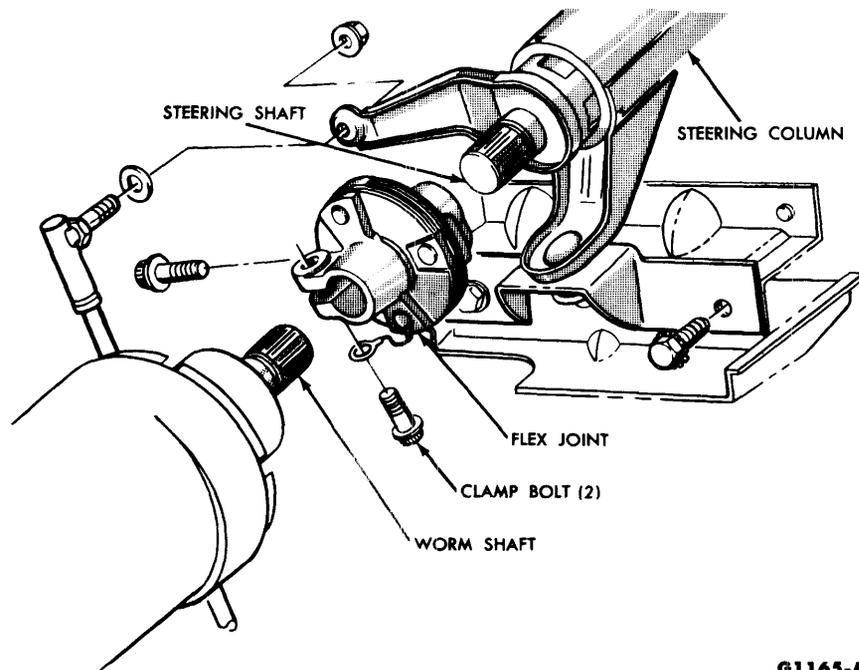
Steering Column and Shaft-to-Steering Gear Connections
